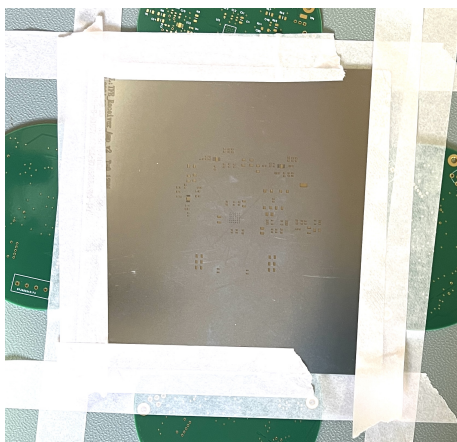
UWOCS receiver PCB fixed under its stencil before applying the solder paste
